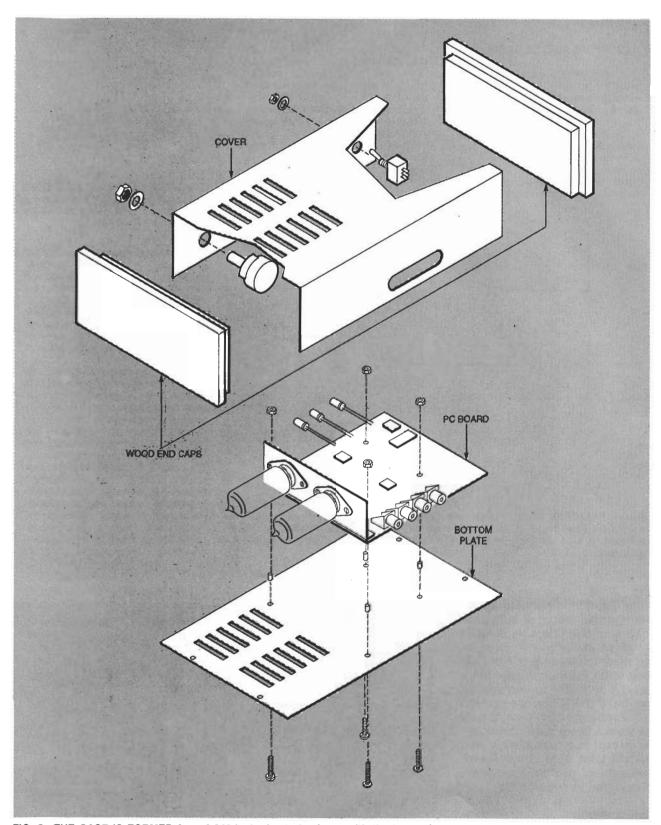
THE CASE IS FORMED from 0.040-inch sheet aluminum with the top and bottom held together by screws driven into the wooden end caps. You can purchase this case from the source given in the Parts List.
